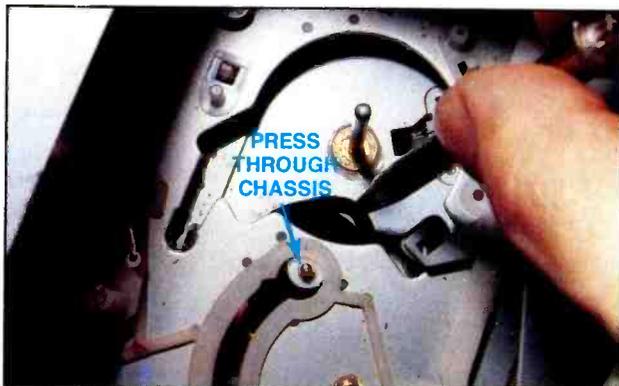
With the idler almost all the way to the right, gently press it through the chassis. Roll the tire free from the idler wheel, then grab it with a parts picker held in the right hand.
